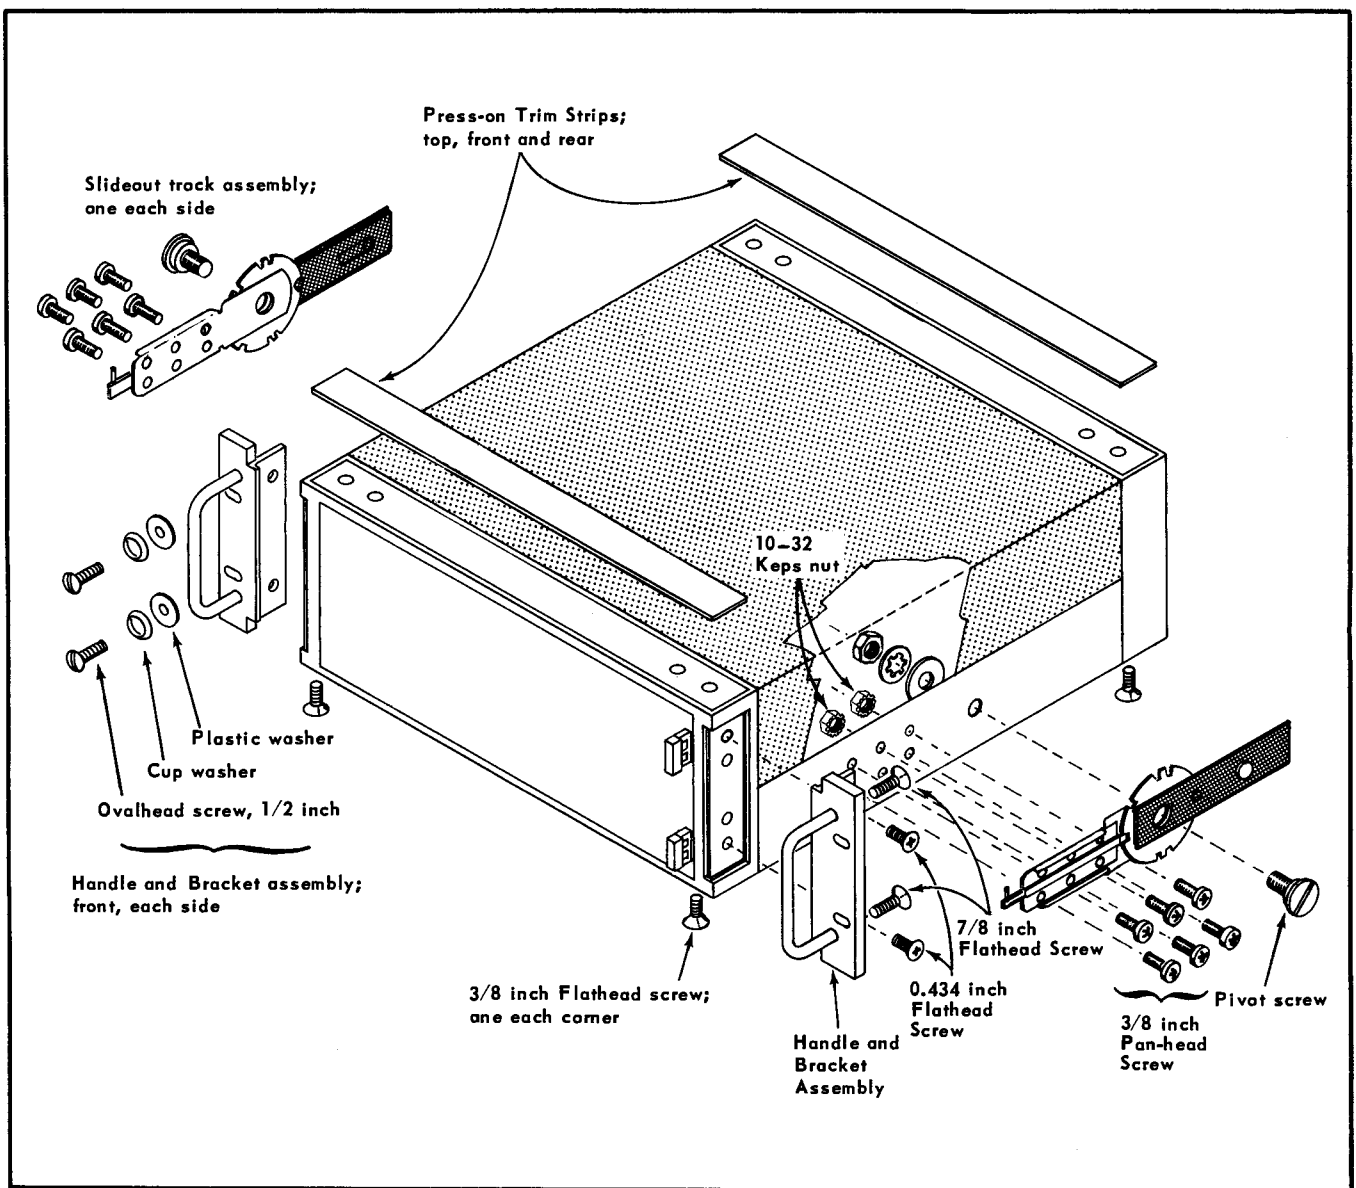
Parts peculiar to the Type R241 chassis. See Figs. 9-4, 9-5 and 9-10 for rack attachment parts.
